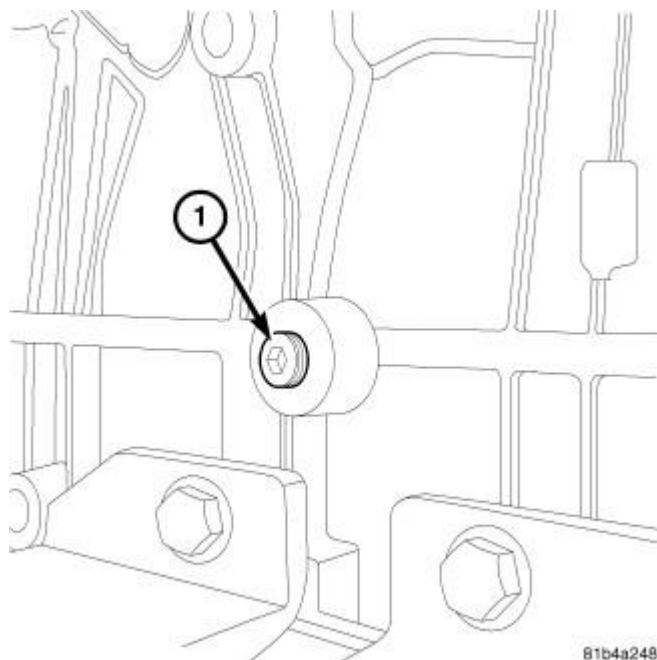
CRANKSHAFT LOCK PLUG LOCATION
